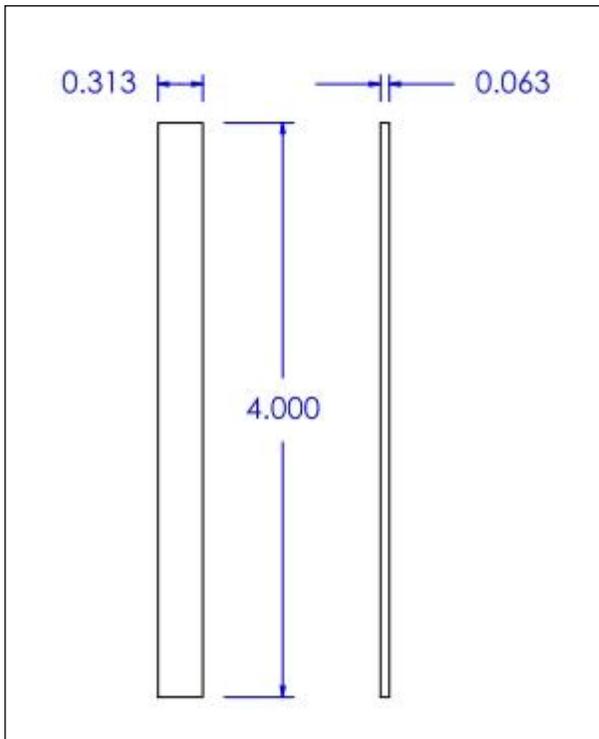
Construction drawing of the center sections of the pendulum. Two pieces are required.
